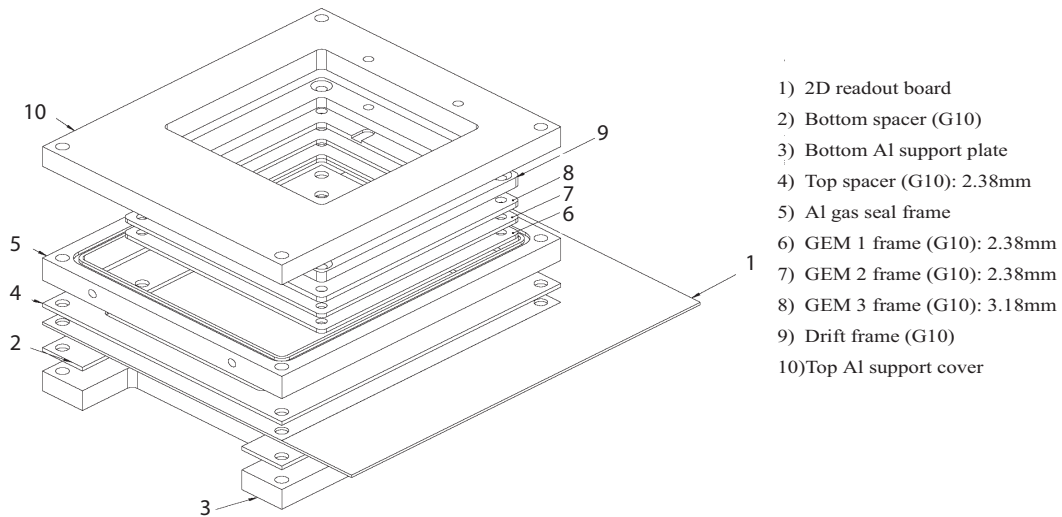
Exploded view of a prototype triple-GEM chamber indicating the location of various chamber elements.
